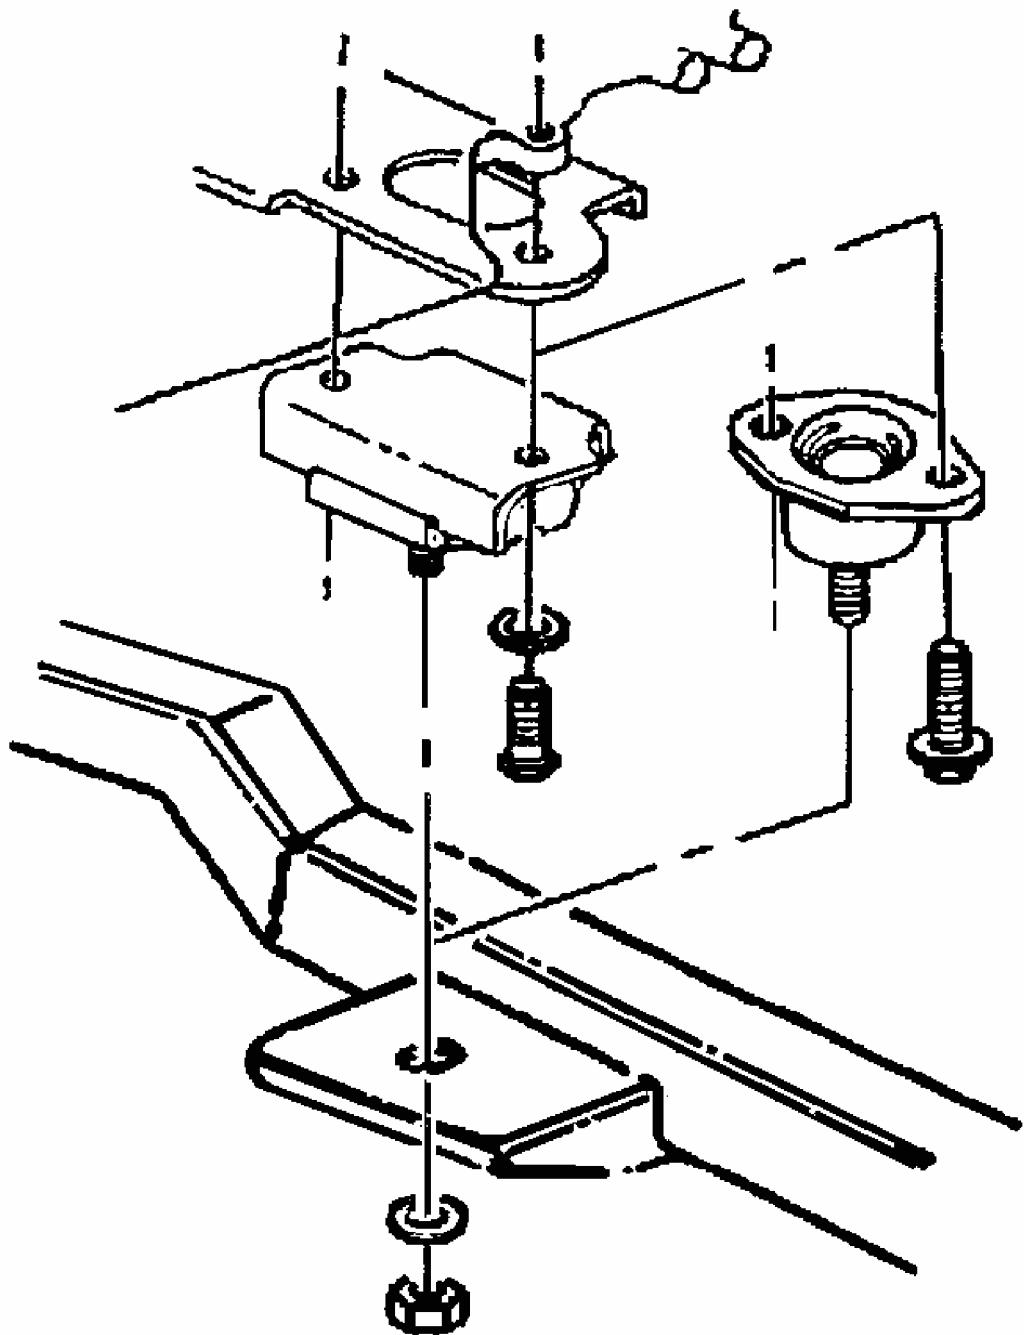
Removing & Installing Mounting Bolts (2.2L)
